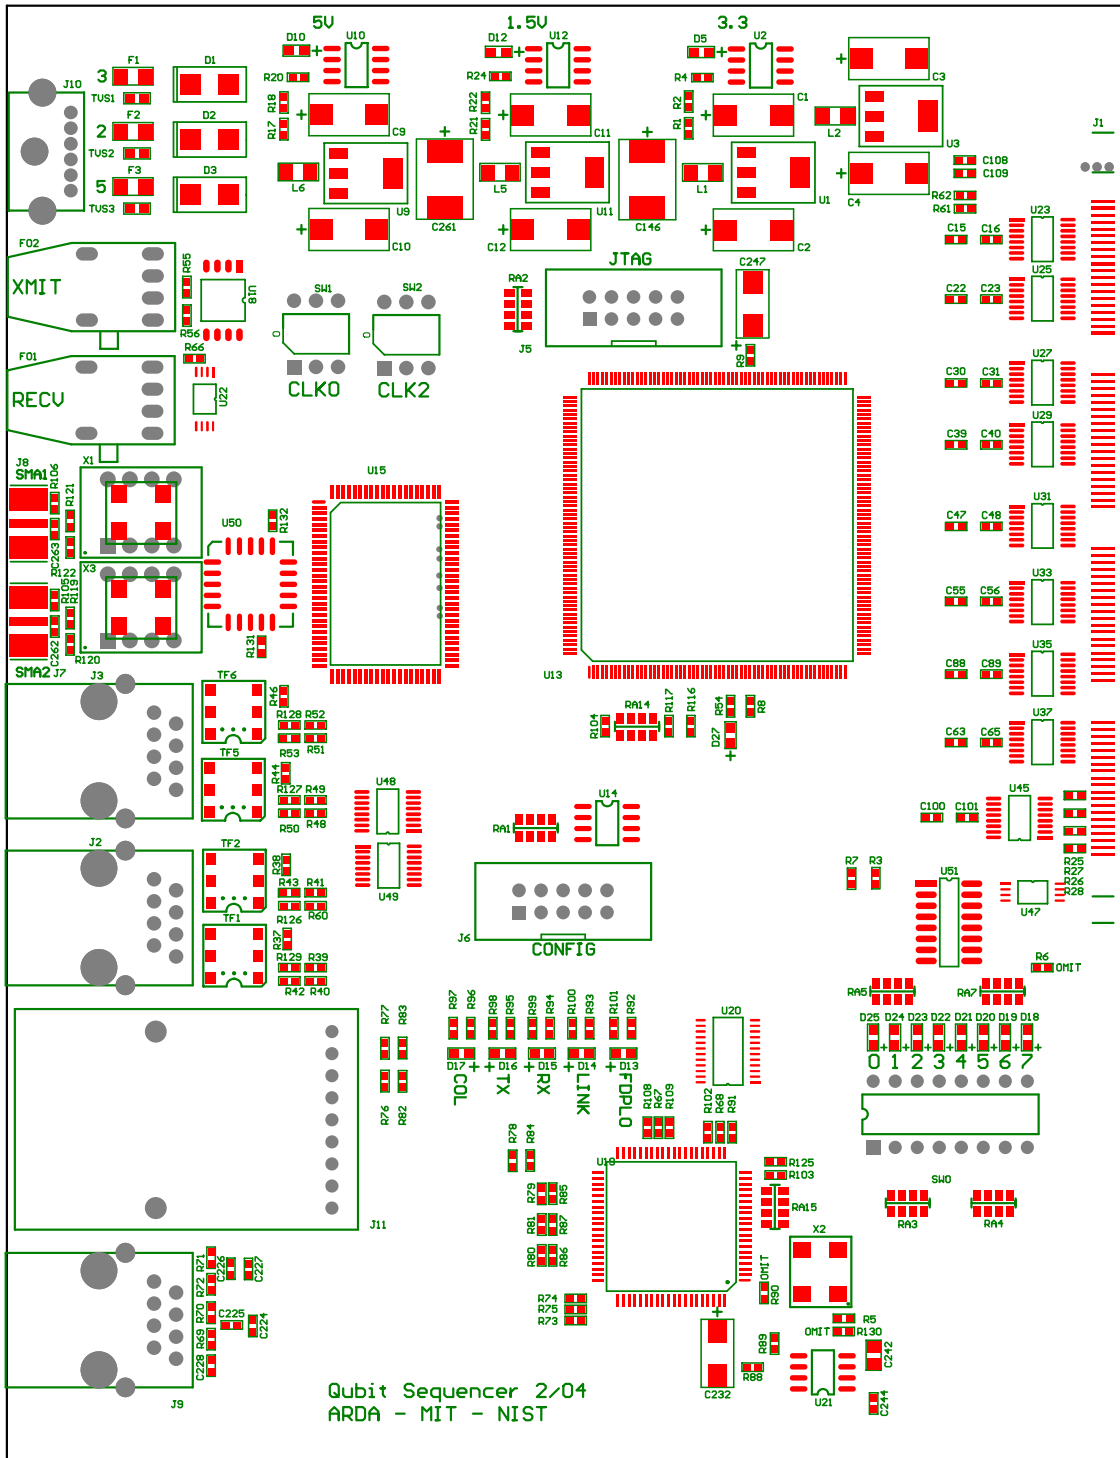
Assembly drawing for top side (pads and silkscreen).
